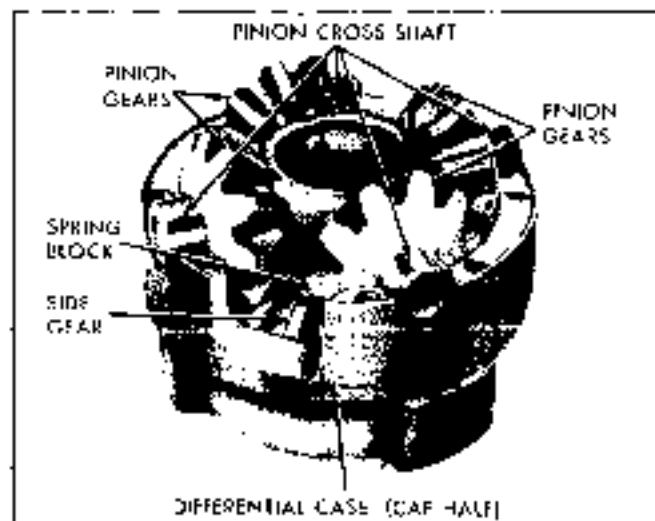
B-13 Installing Parts in Cap Half - Four Pinion
